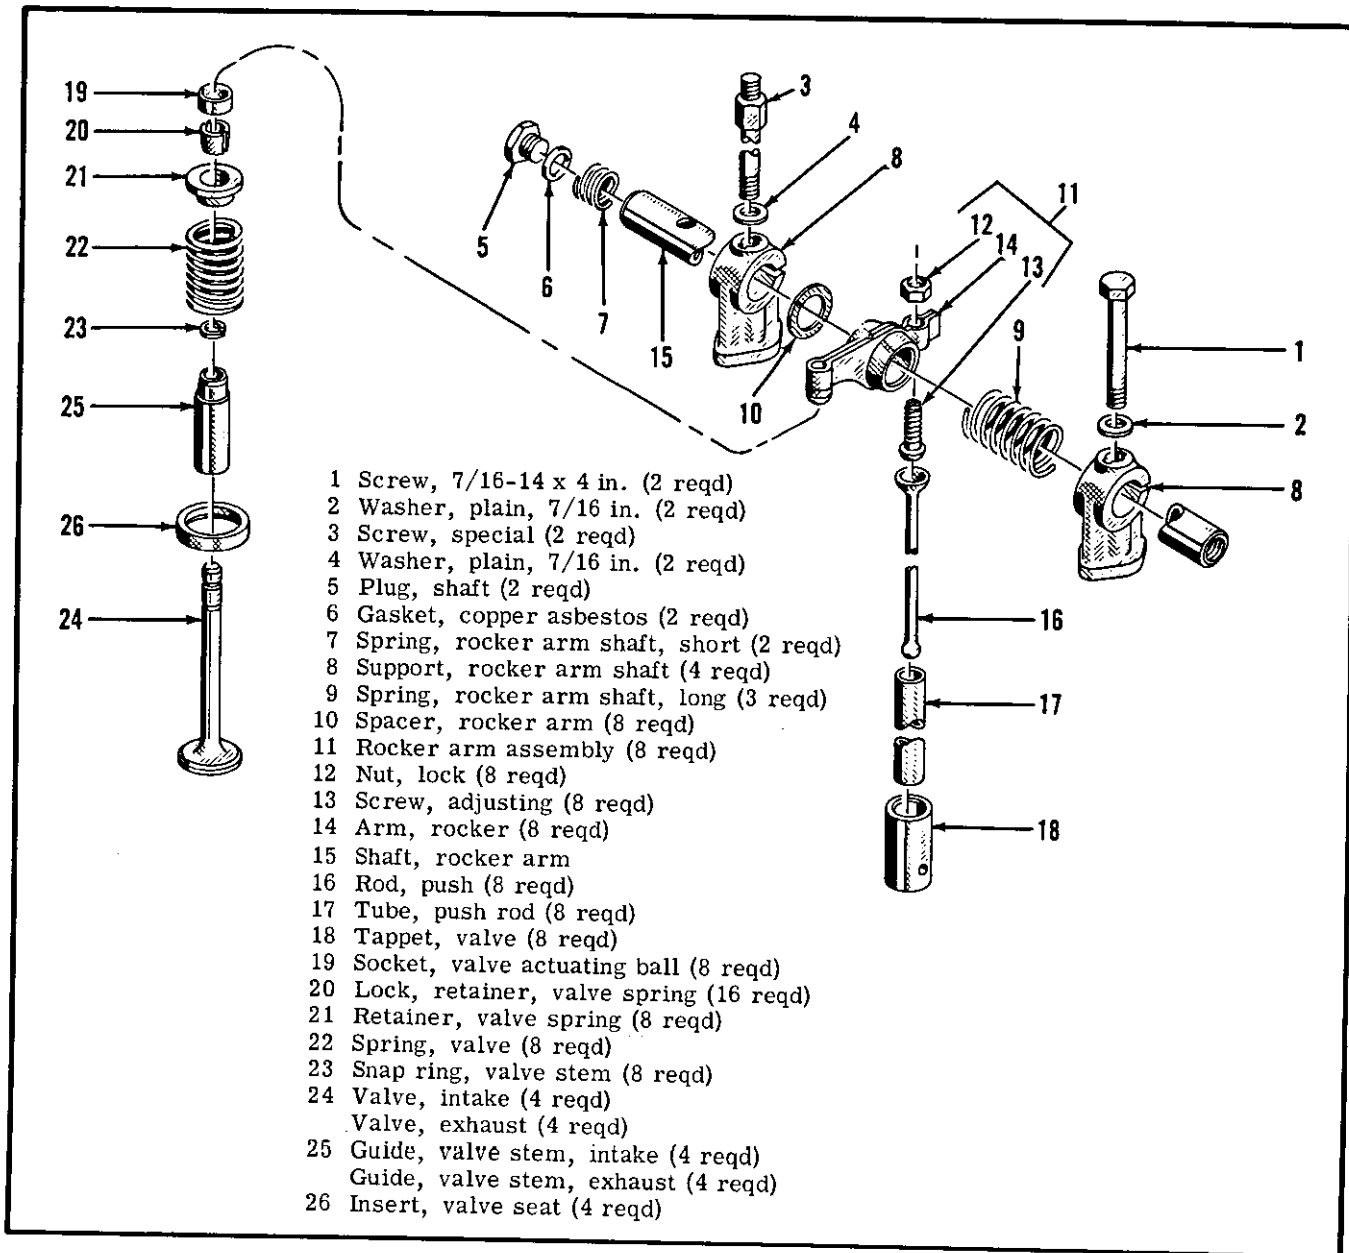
Rocker Arms, Push Rods, and Valves, Disassembly and Reassembly
